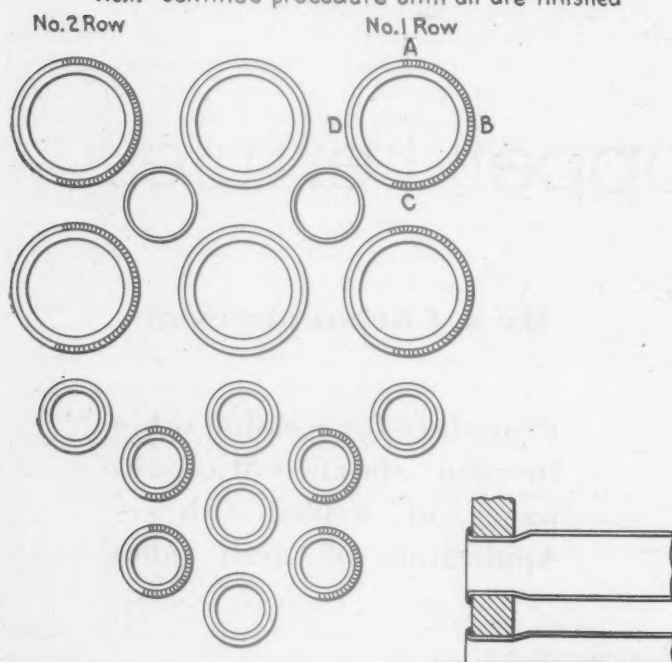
Sketch of procedure for welding tube and flue beads
